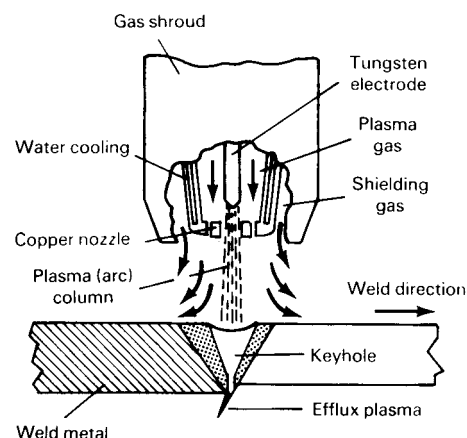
Plasma arc welding process, showing constriction of the arc by a copper nozzle and a keyhole through the plate
